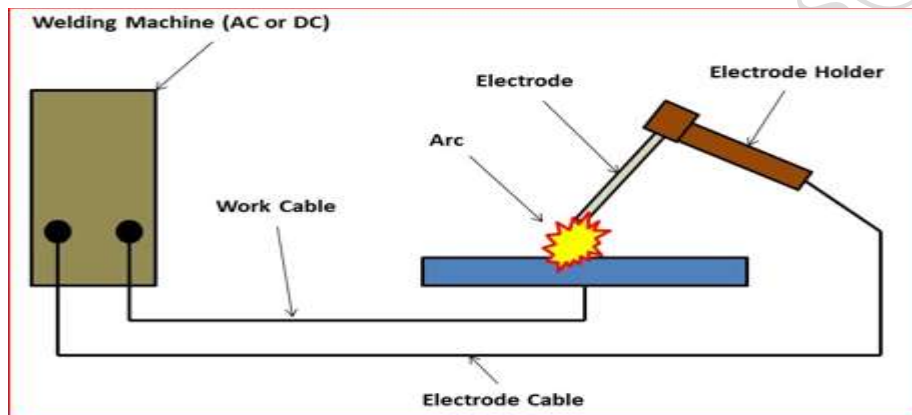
Basic arc welding machine (TOM, 2017)
